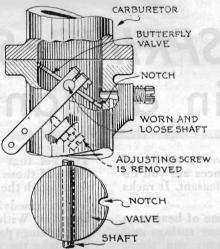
With adjusting screw removed, file a notch in the butterfly valve to govern the idling speed of the motor, when the bearings admit air.
